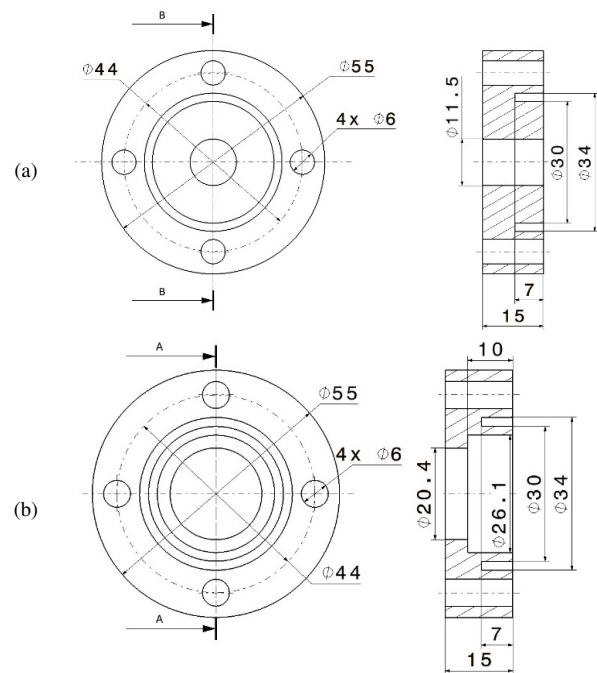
(a) Nozzle sealing flange, (b) opposite side sealing flange (feeding area).
